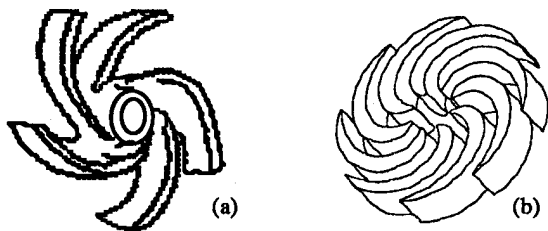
(a) Typical open impeller and (b) integrated motor/pump impeller.
